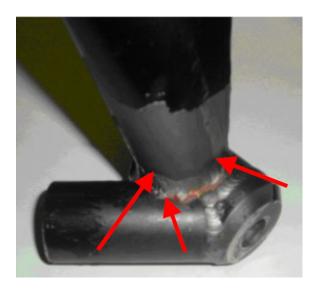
Cracks around Tube Cluster (Note: crack extends into tube)
